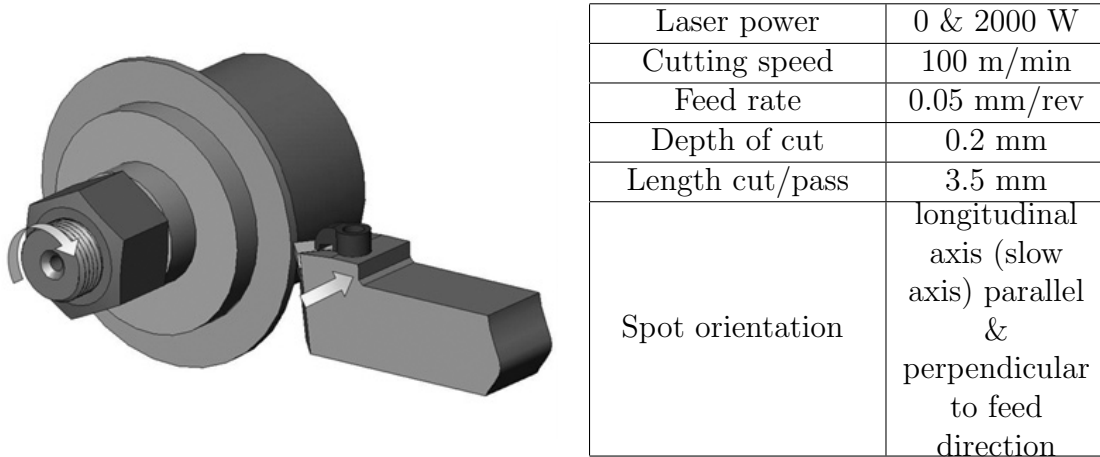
Longitudinal turning configuration and cutting parameters.
